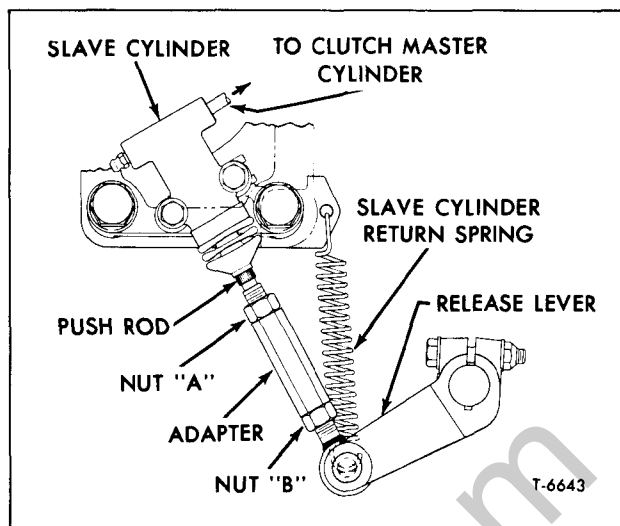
Clutch Controls with Spicer Clutch (HN, JN 90)
